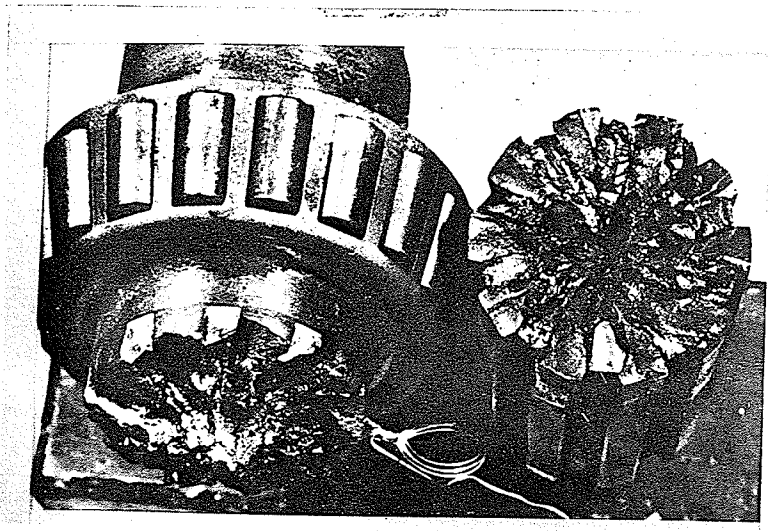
The "starry" fracture surface of a spline shaft which failed in reversed torsional fatigue (10)
